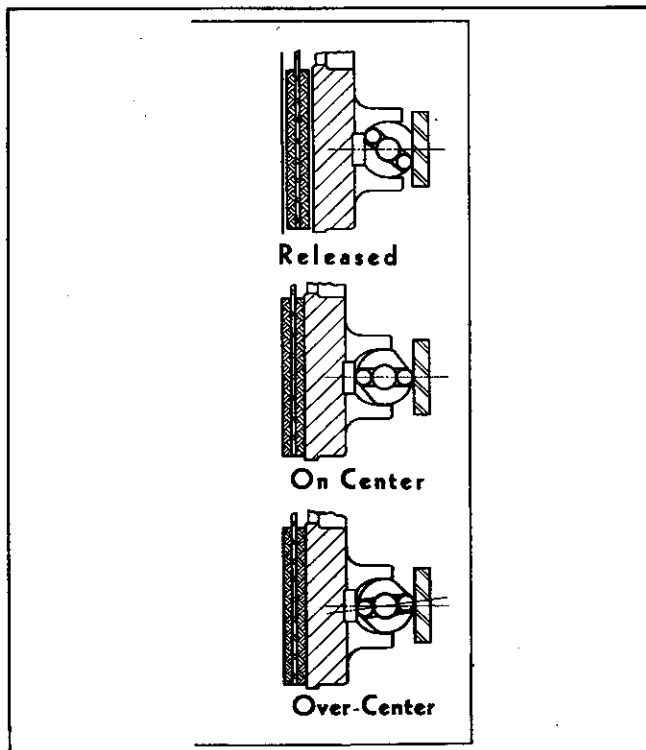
Clutch Cam Positions for Full Clutch Release, On Center, and Over Center (Full Engagement).
